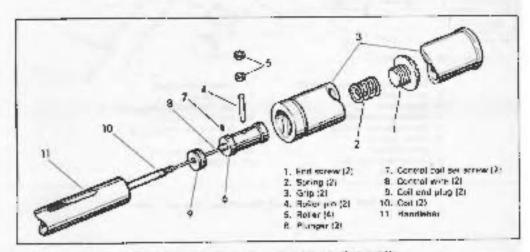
30 Handlebur Control (Spiral Type) - Explanted View
